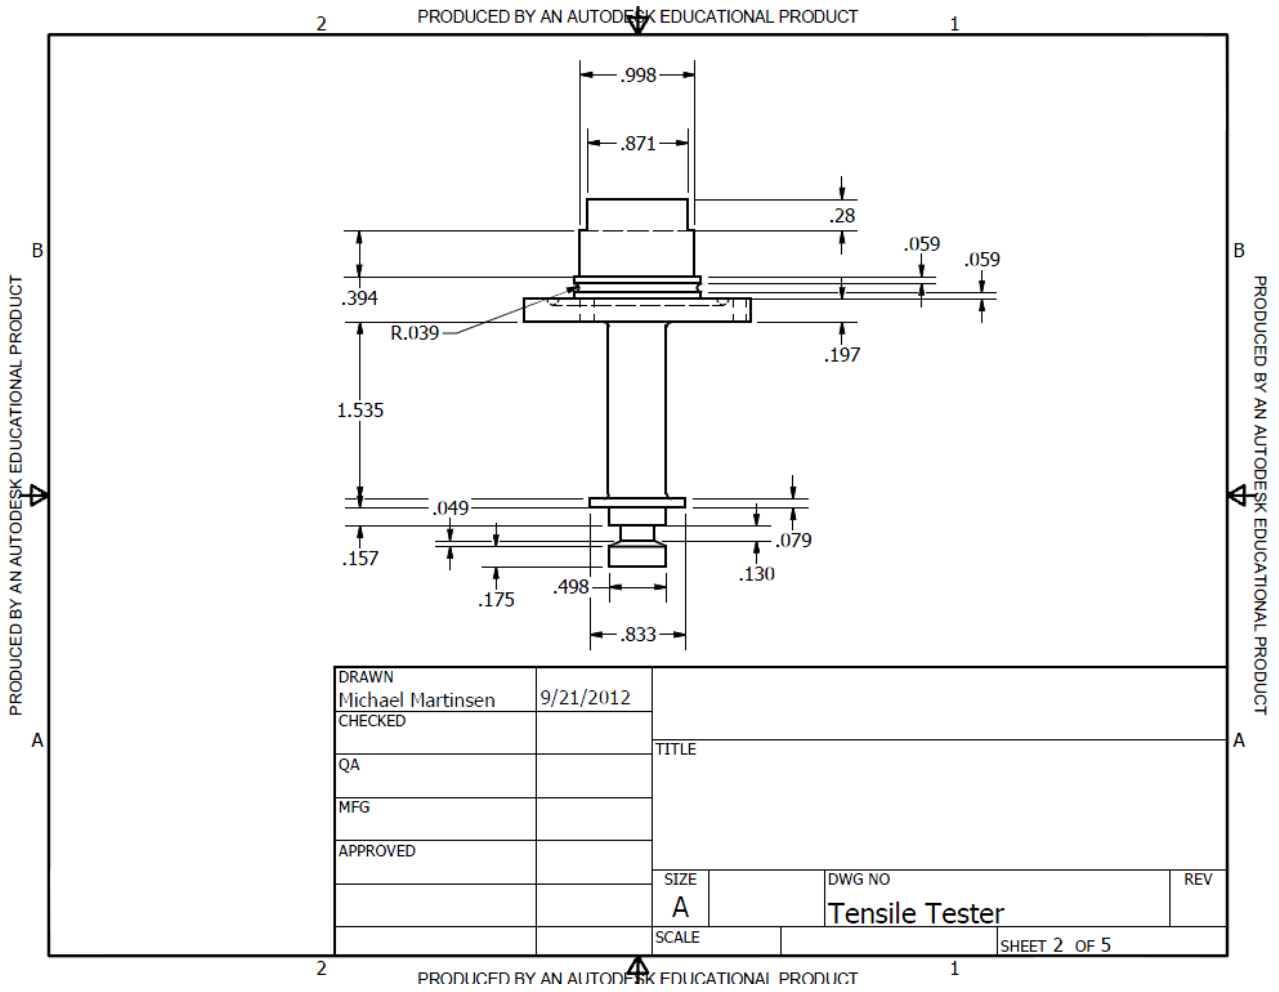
ENGINEERING DRAWING TENSILE TESTER (FRONT VIEW)
